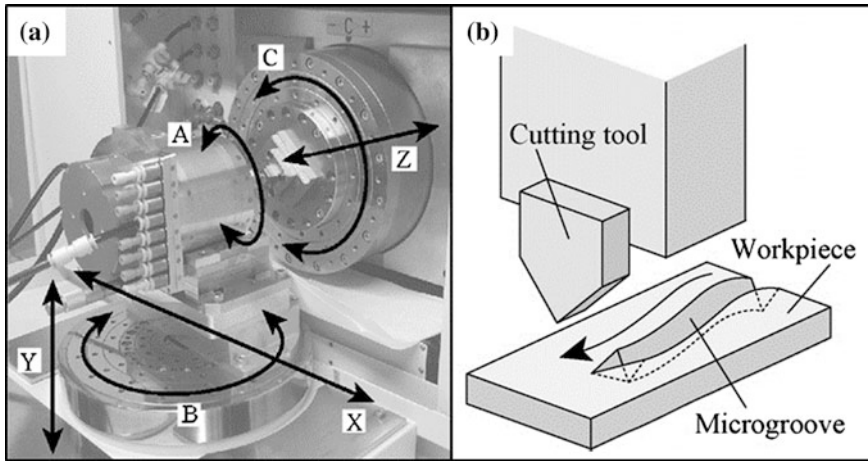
6-axis grooving technique [23]; a configuration and b cutting a freeform groove
